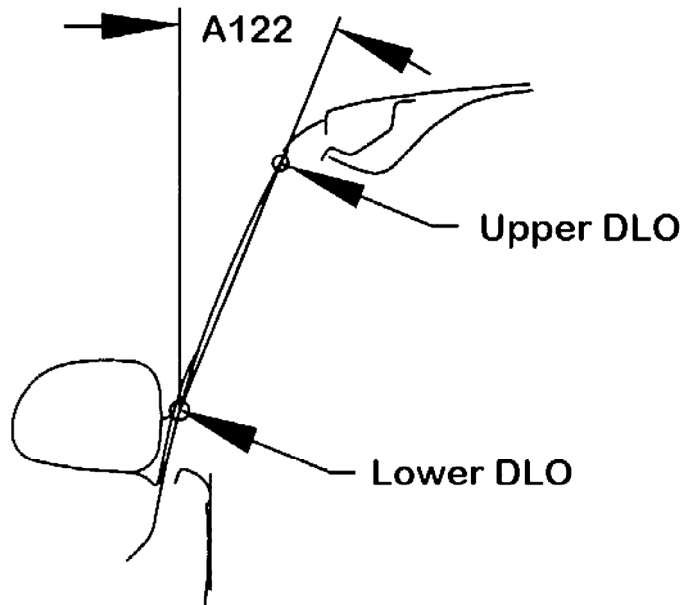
REAR VIEW OF SIDE WINDOW SHOWING TUMBLEHOME
